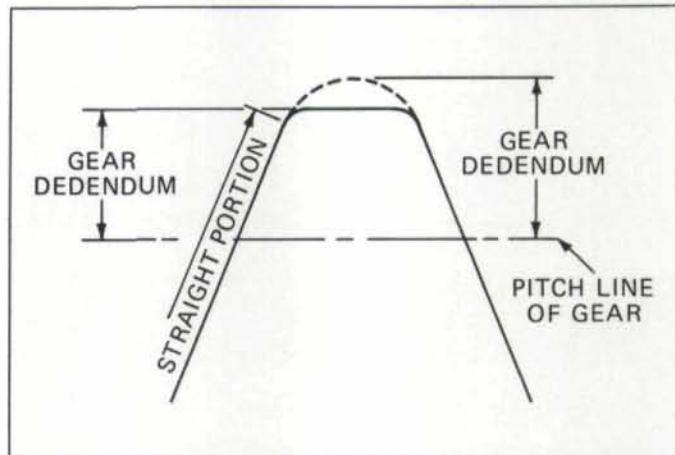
Tooth form of preshaving hob. If full rounded root fillets are desired, additional whole depth becomes necessary.
